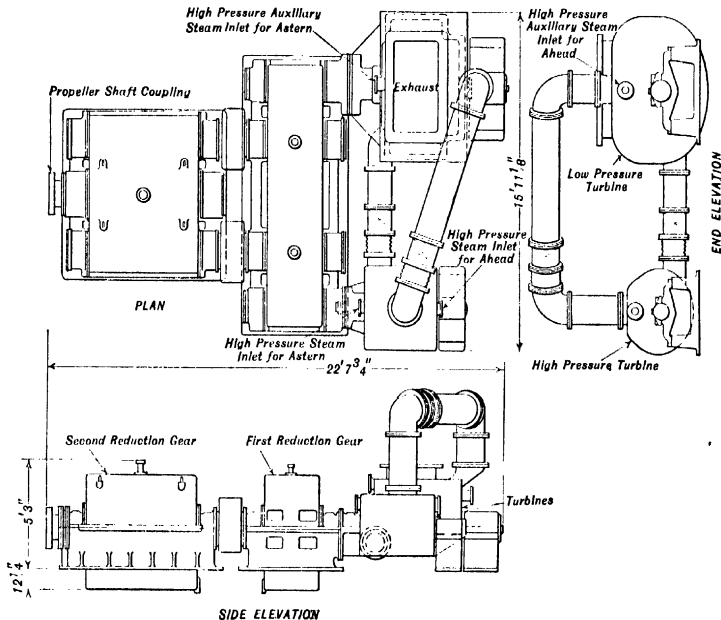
De Laval High and Low Pressure Marine Turbine with Double Reduction Gear; 8000 hp.; 90 R.P.M.
